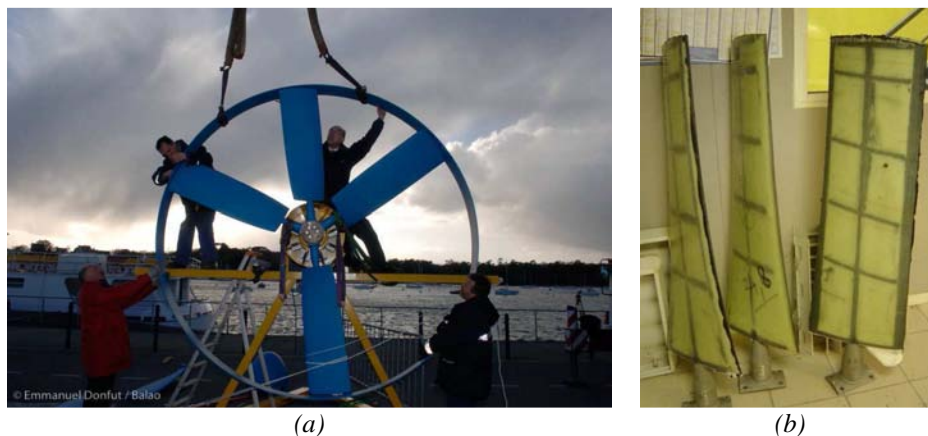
a) Sabella tidal turbine during assembly, b) Detail of blades during manufacture
